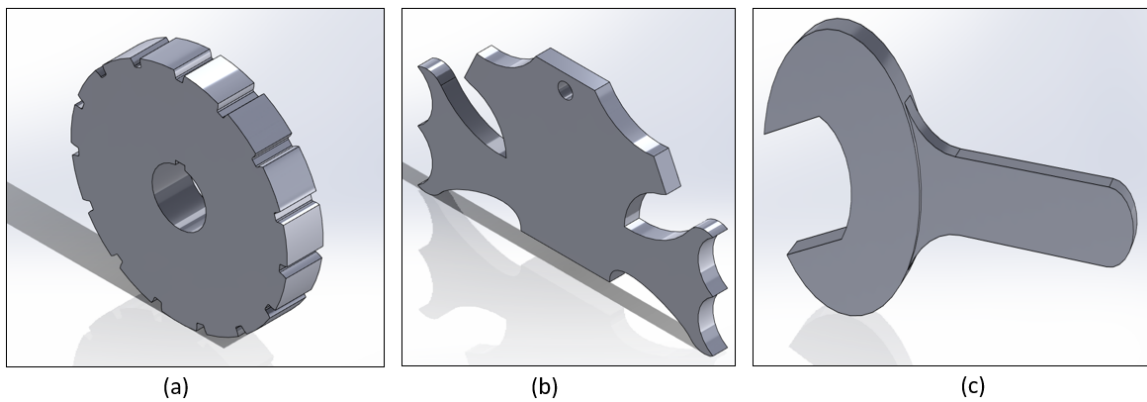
(a) Spur gear CAD Design, (b) key tag CAD design, (c) wrench CAD design.
